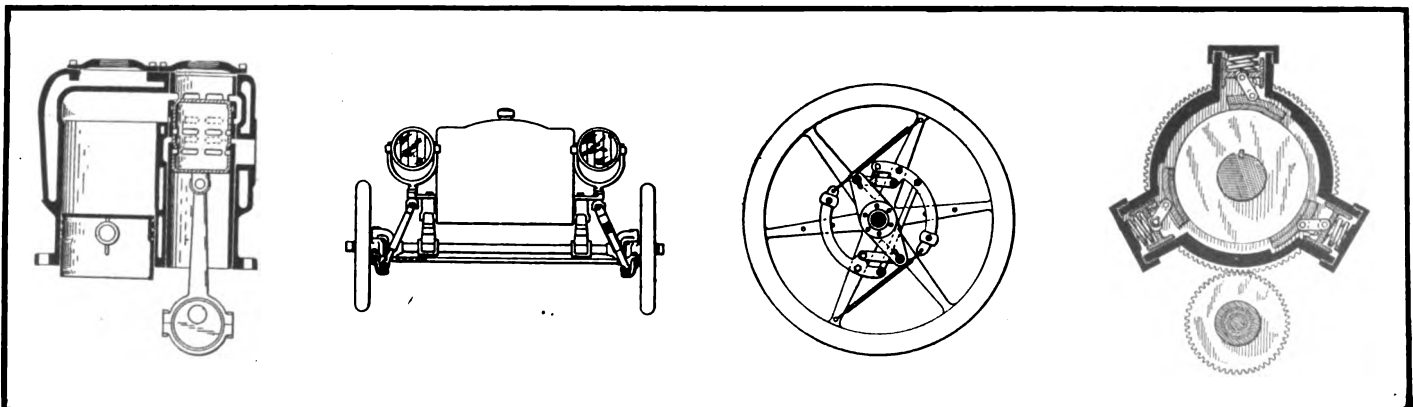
Teetor sleeve valve. Fig. 2—Cunningham lamp adjuster. Fig. 3—Weber mechanism for drive control. Fig. 4—Boyle clutch
